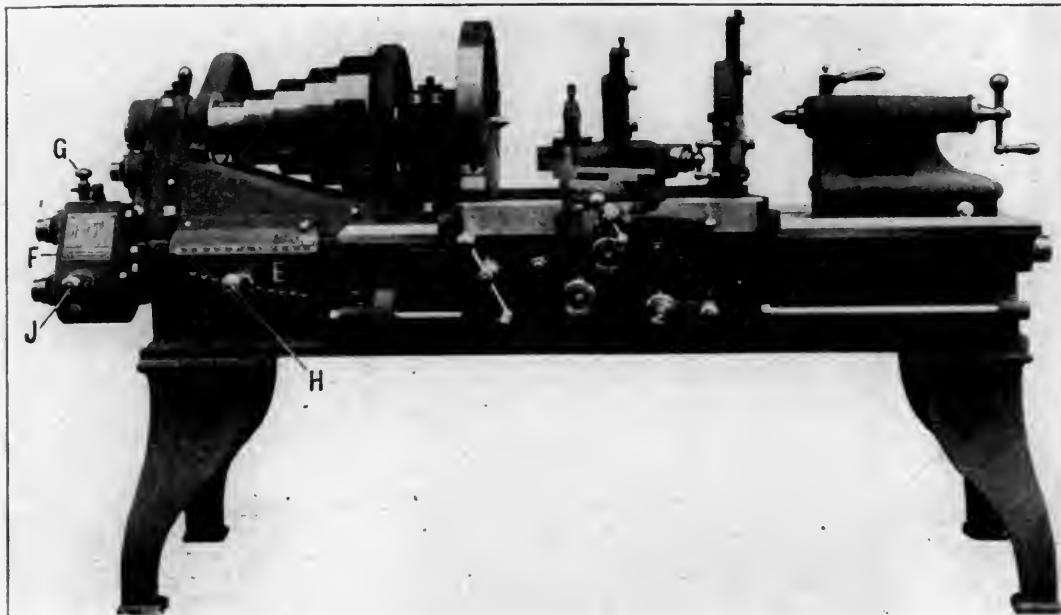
THE NEW 18-IN. ENGINE LATHE, SHOWING ARRANGEMENT OF THE VARIABLE-SPEED FEEDING ATTACHMENTS.—AMERICAN TOOL WORKS COMPANY.
